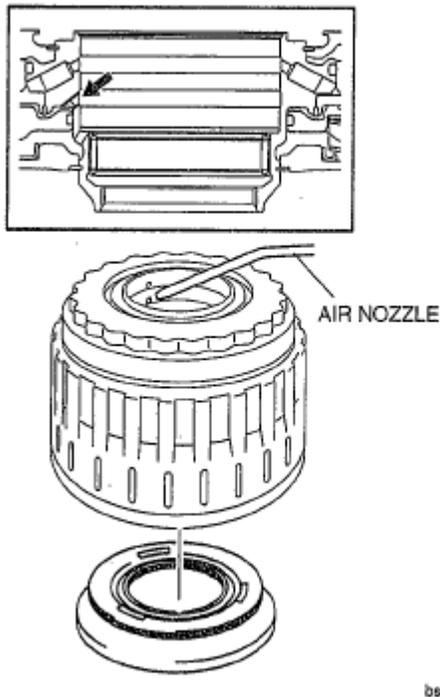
Identifying Oil Passage For Applying Compressed Air
